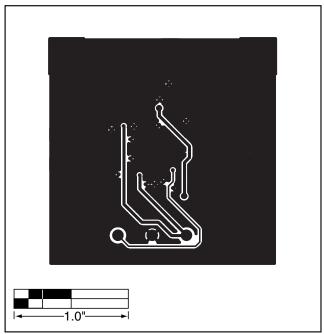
MAX9993 EV Kit PC Board Layout—Inner Layer 3 (Routes)
